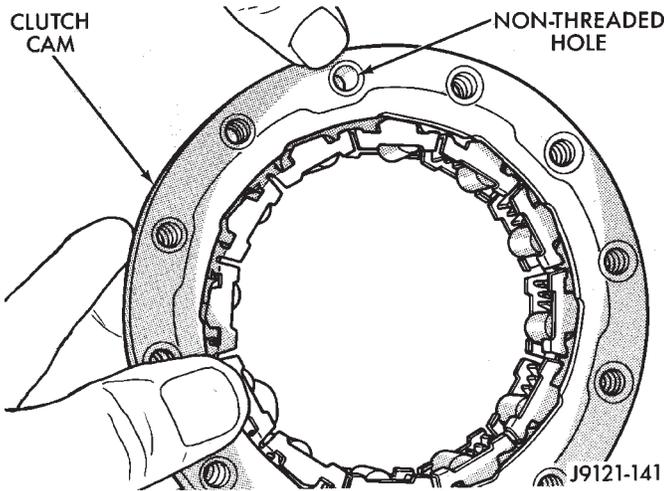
Location Of Non-Threaded Hole In Clutch Cam
